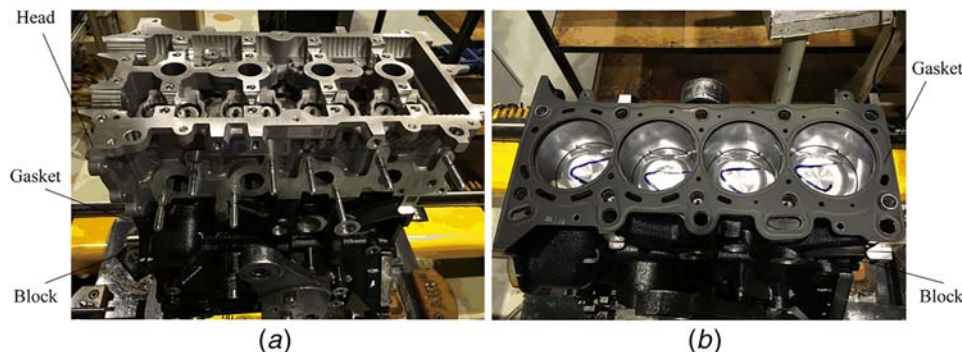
(a) Assembled engine cylinder head and block and (b) gasket and block
